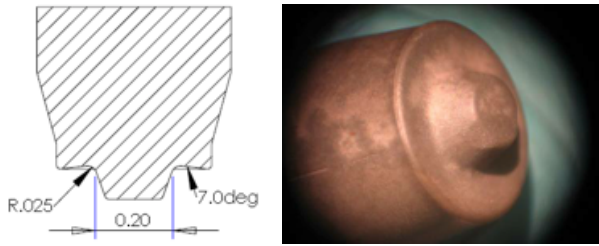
FSSW tool geometry of concave shoulder tool (DIM97).
